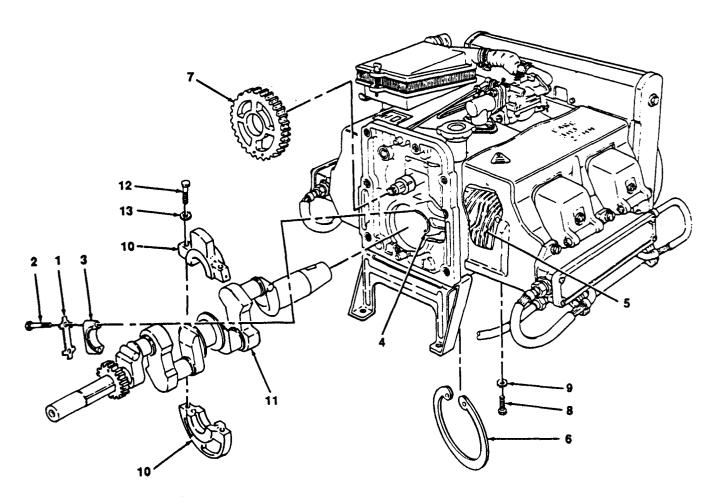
Crankshaft and Center Main Bearing, Removal.
